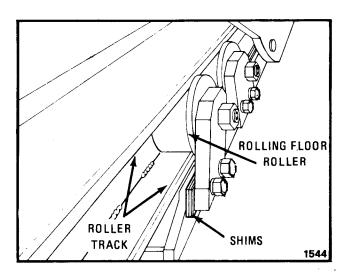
Rolling Floor Roller Clearance and Adjustment
